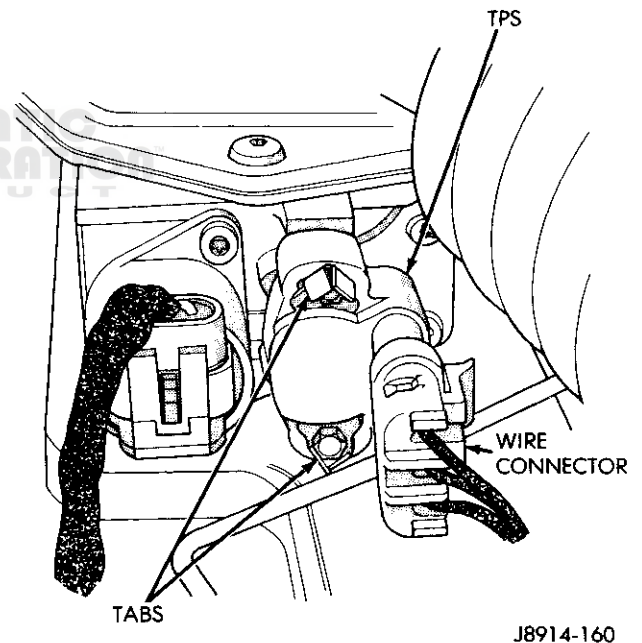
Throttle Position Sensor Remove/Install—Typical
